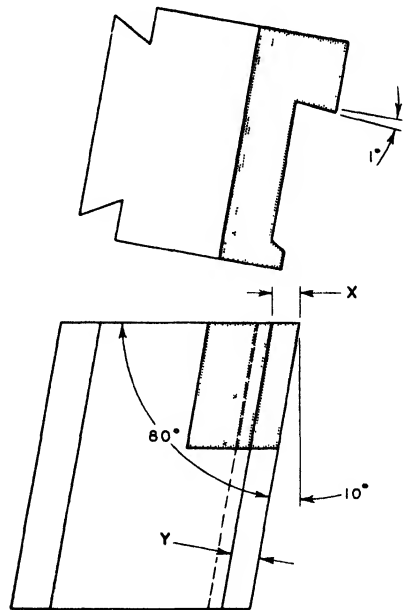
A Straight Forming Dovetail-Type Tool without Back Rake
